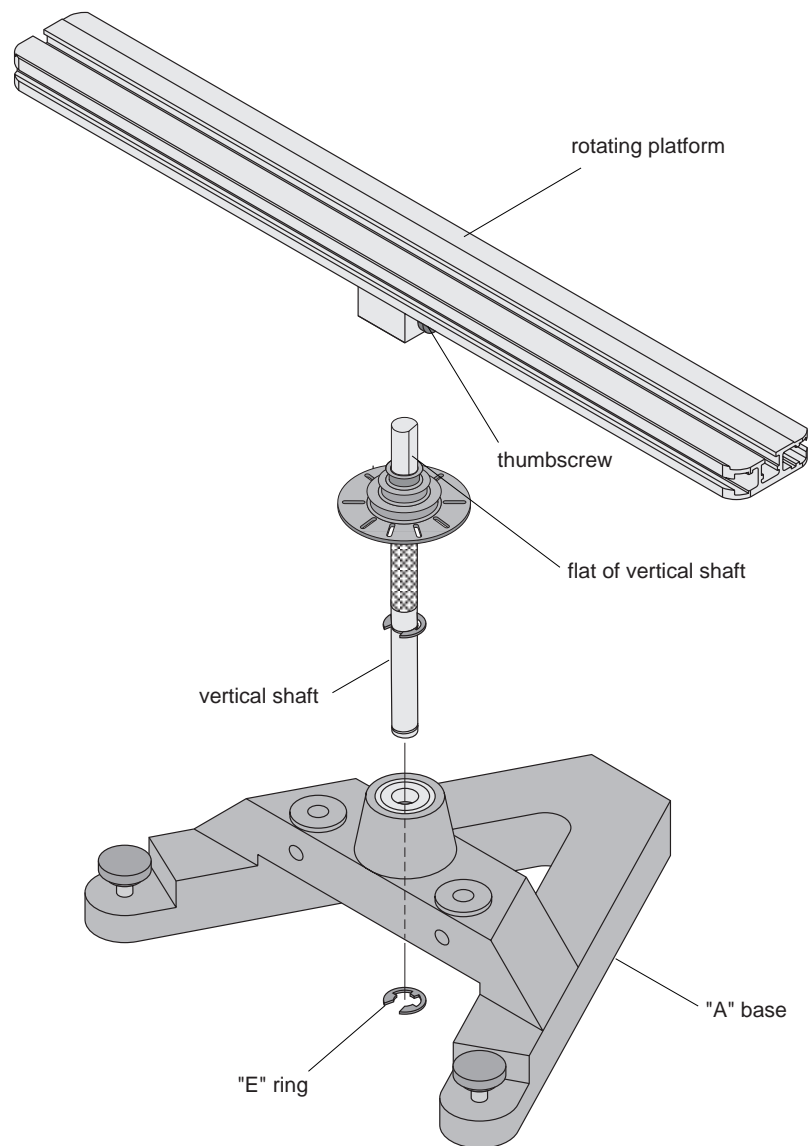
Attaching the Vertical Shaft to the Base and Rotating Platform Assembly
